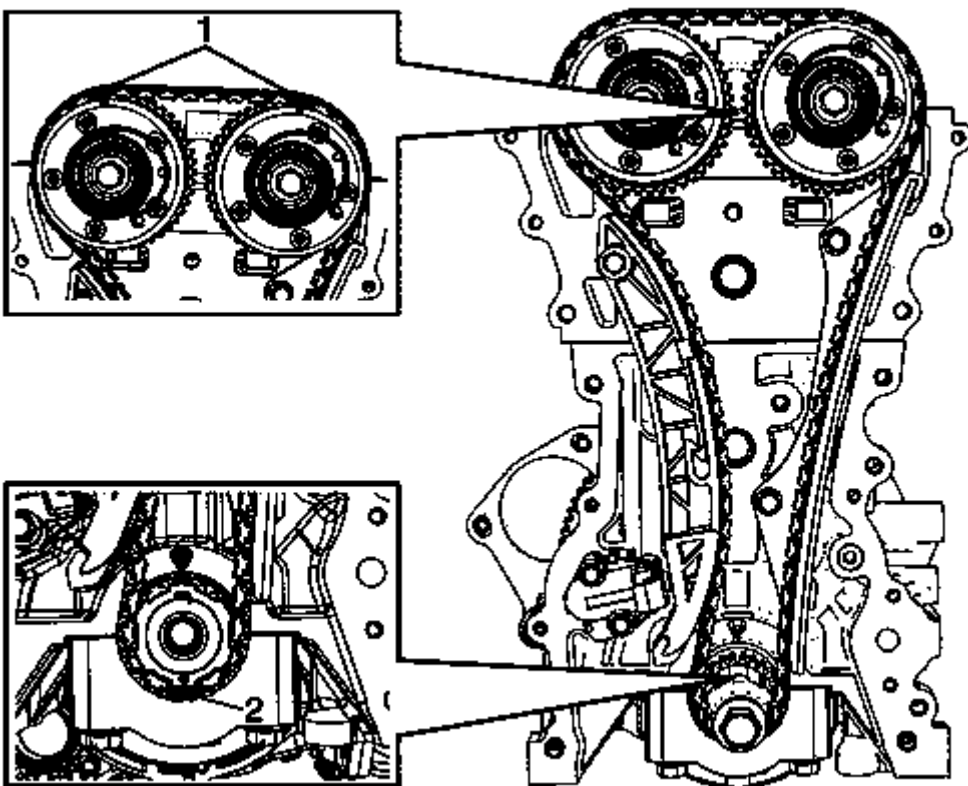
Rotating Crankshaft To TDC (Top Dead Center) Position
